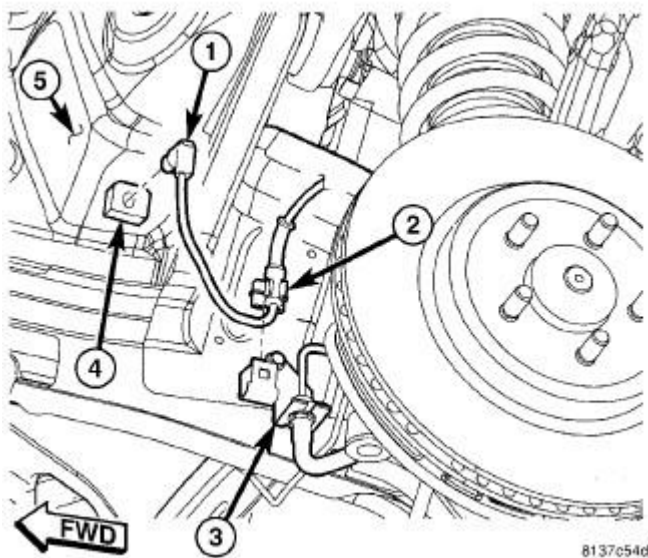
WHEEL SPEED SENSOR AT BODY CONNECTOR
